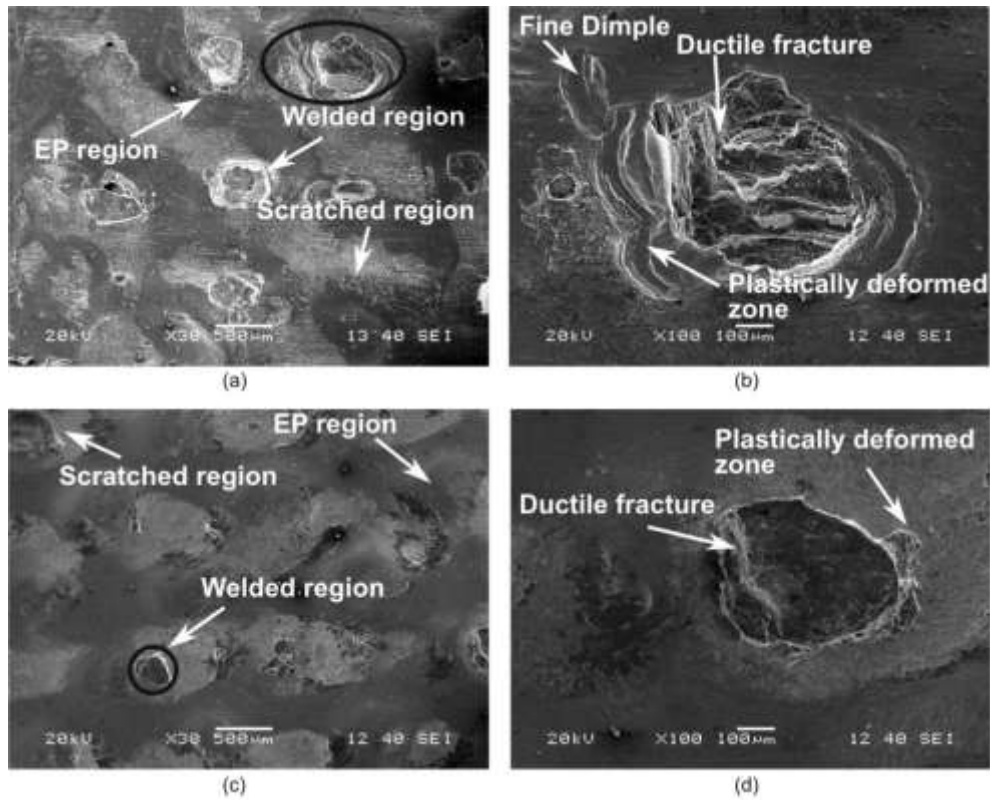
Fractured surfaces of ultrasonically welded specimens in EP surface condition (a) Al side surface with 30X zoom; (b) Magnified image of a; (c) Cu side surface with 30X zoom; (d) Magnified image of c
